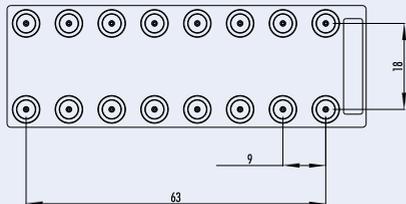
Microscopy slide Luer platform – version 16 fluidic interfaces
